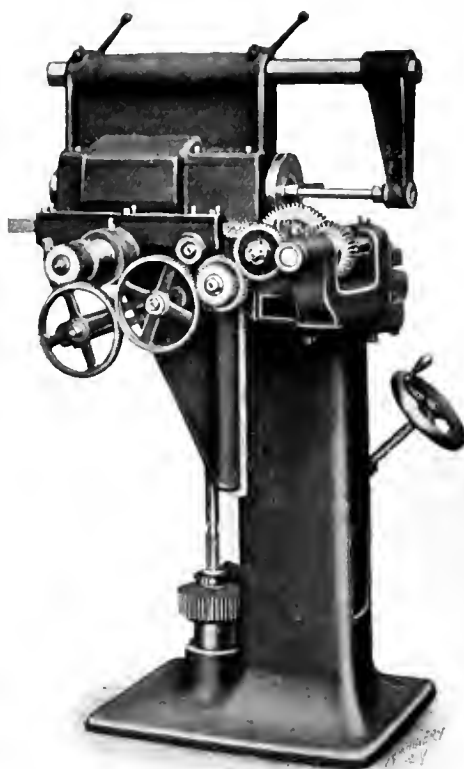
Left Side of Machine, showing Spindle and Work Drives.
